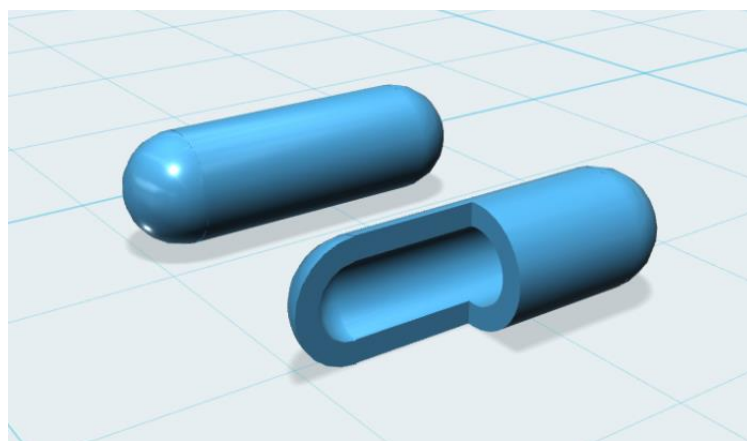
3D representation of the capsular device (8.6mm length x 2.65mm diameter - 0.5mm shell thickness), cross section (front) and complete (back)
